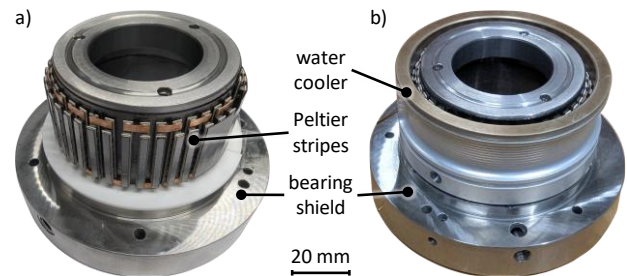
Assembly of the front bearing seat; a) installed Peltier stripes; b) Peltier stripes and water cooler.
